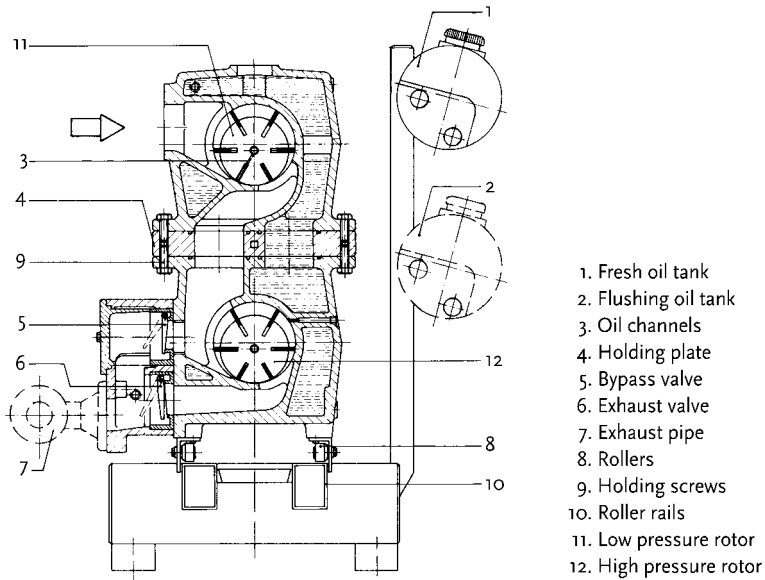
Sliding vane vacuum pump, two-stage design (Huckepack), fresh-oil lubrication (acc. to Dr. Ing. K. Busch GmbH)
